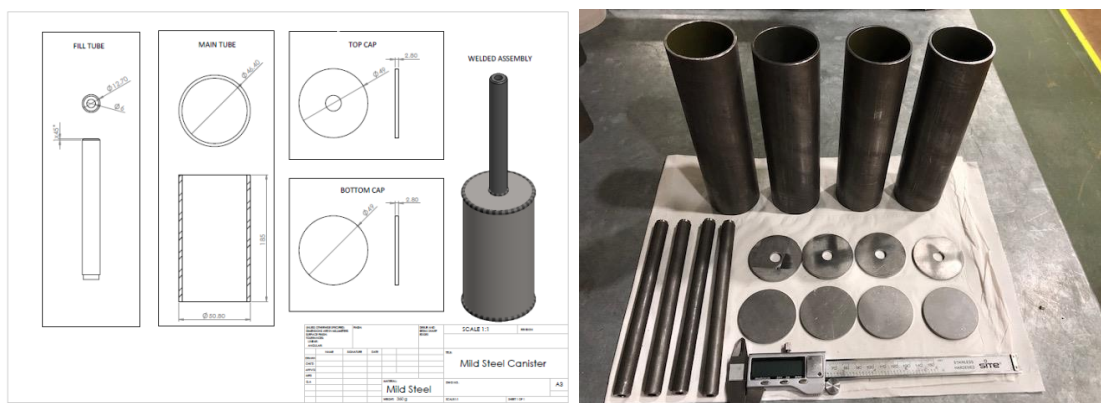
Technical drawing of the canister (left), low carbon steel canisters before the welding procedure (right).
